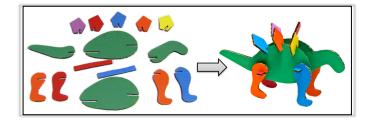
PHYSICAL FABRICATION OF 3D DESIGN PROTO-TYPE CREATED IN PROTO-TAI, USING A LASER CUTTER.
